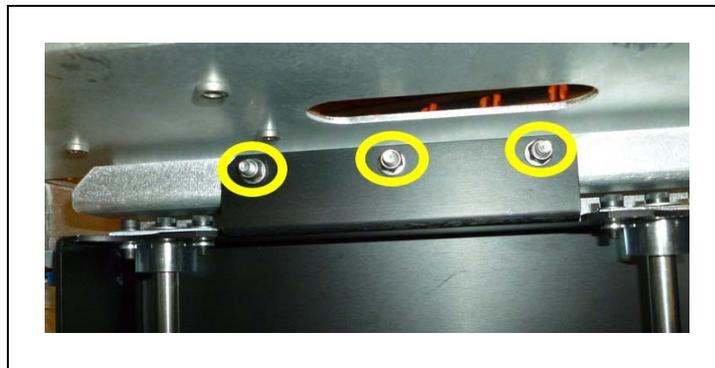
Mounting Studs and Nuts at top of Drive Assembly
